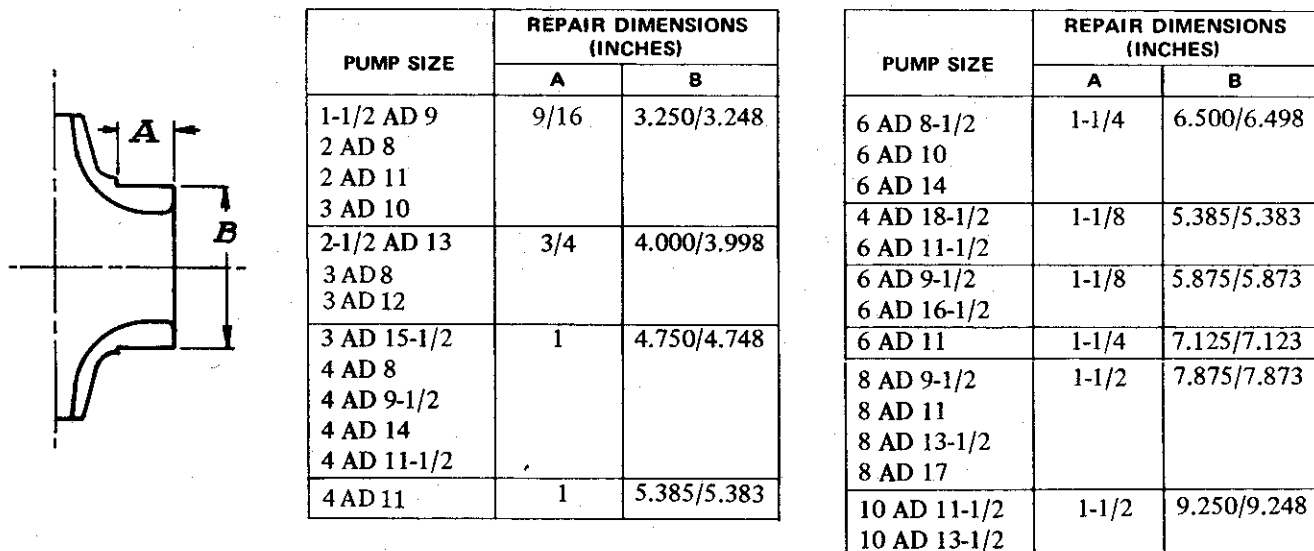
IMPELLER DIMENSIONS FOR WEAR RING INSTALLATION
